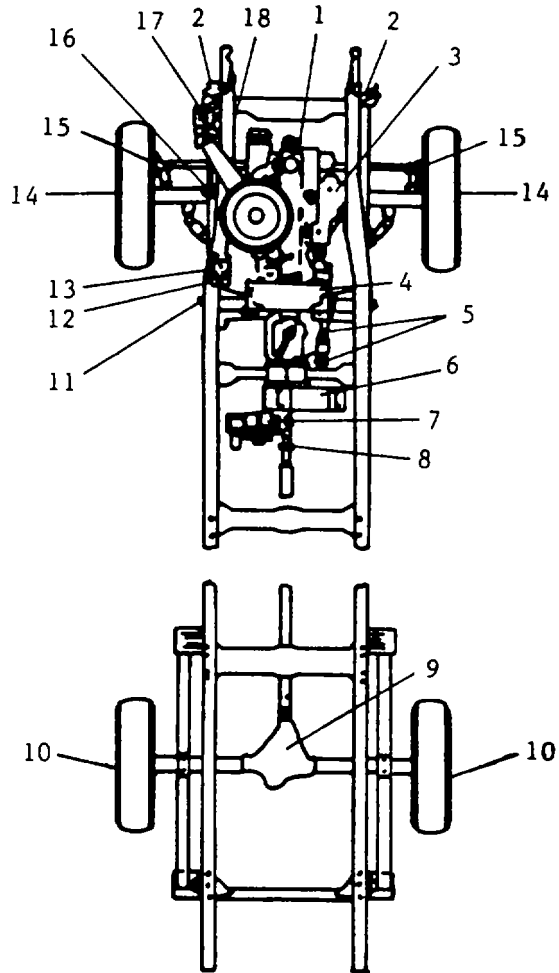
CHASSIS LUBRICATION SCHEMATIC.
